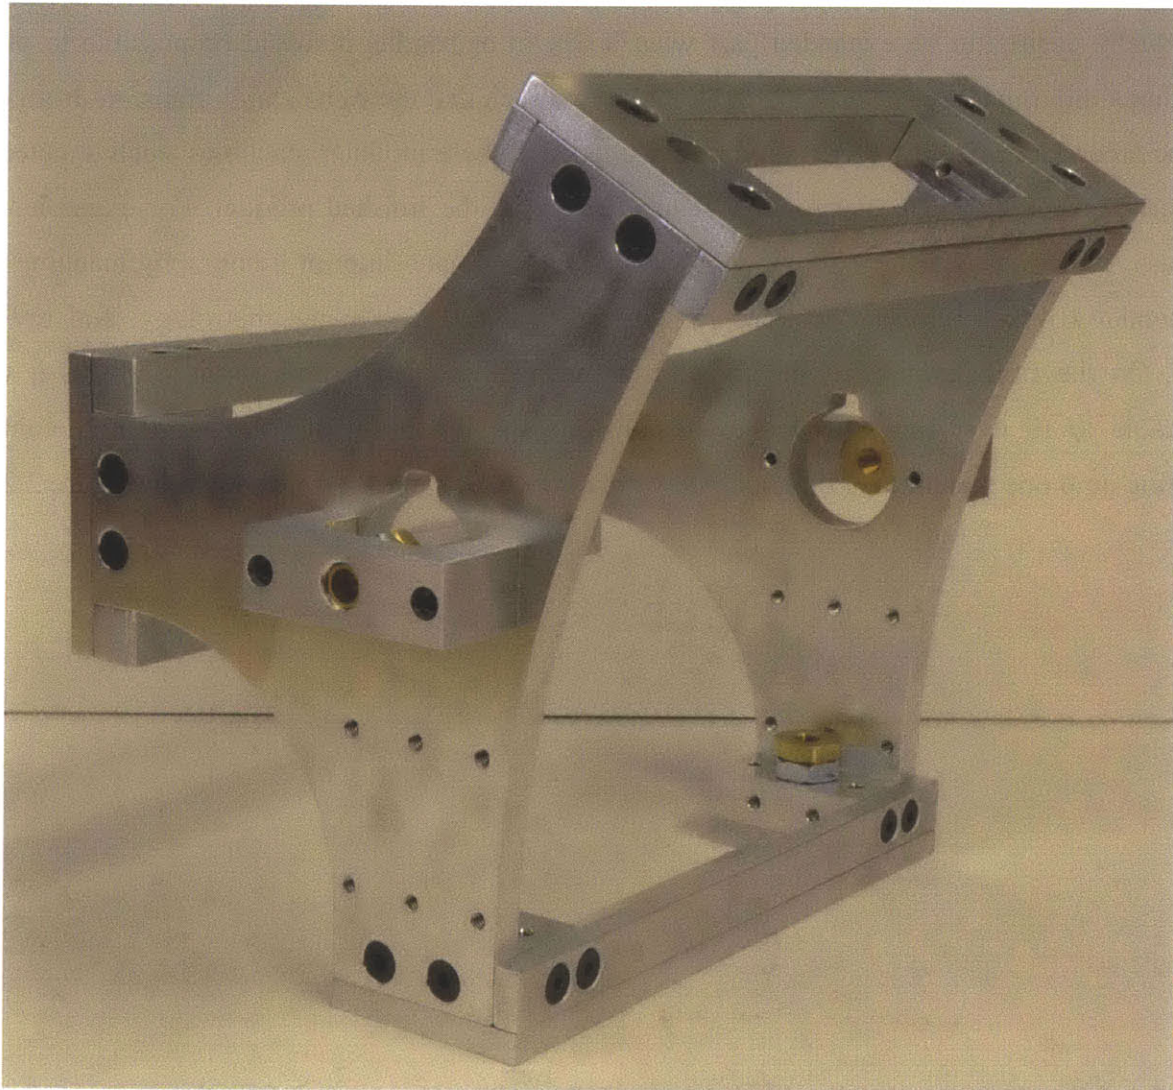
Impression roll assembly frame with air bearing mounting nuts installed
